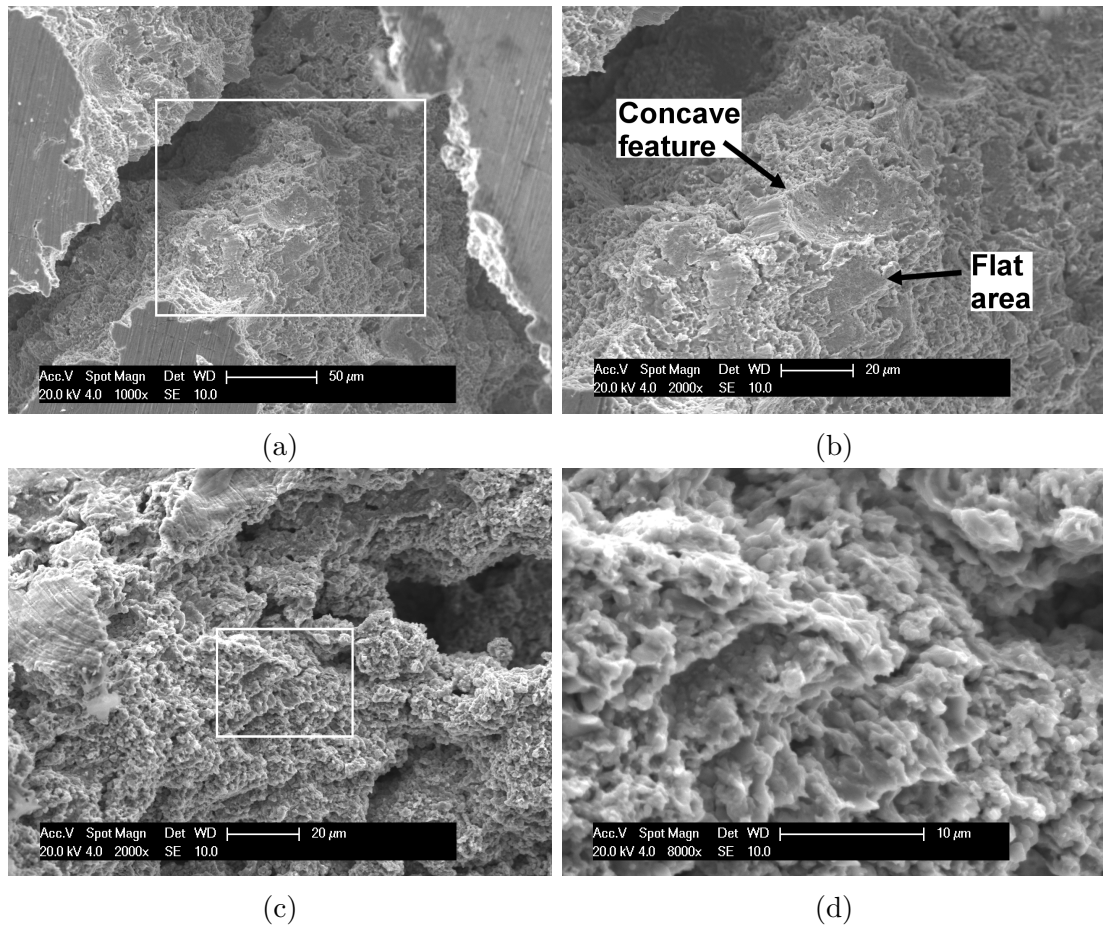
Fracture surfaces of the C1 coating specimens following SPT testing at RT (a-b) and 700 $^{\circ}\text{C}$ (c-d) where the white boxes outline the areas shown in the higher magnification images (right).
